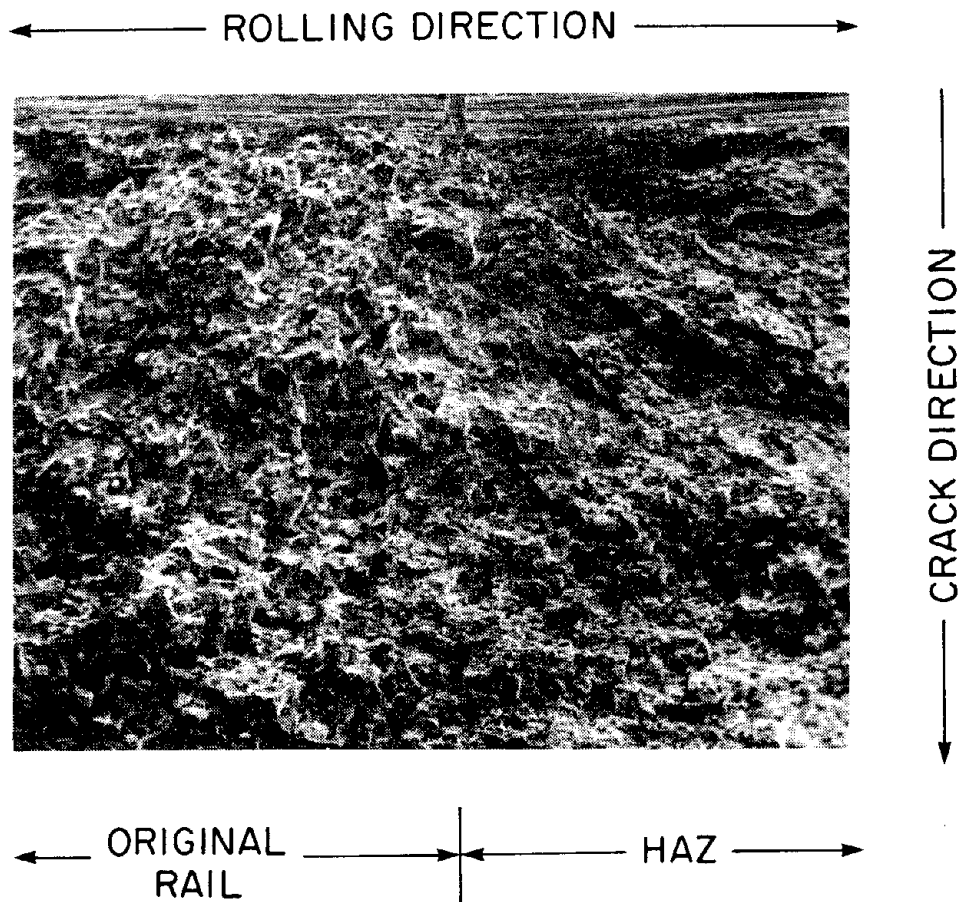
FRACTURE OF IMPACT SPECIMEN THROUGH THE REGION OF MINIMUM HARDNESS IN THE HEAT-AFFECTED ZONE. FRACTOGRAPH IS FROM THE CrMo SIDE OF WELD 1. 17X.
